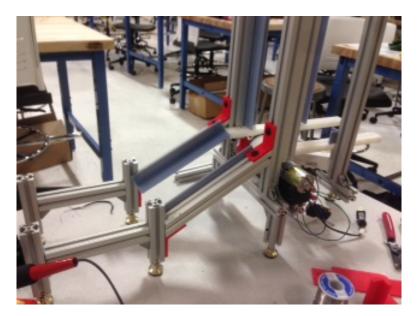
Pamphlet Dispenser Assembly (without front drive wheels)
